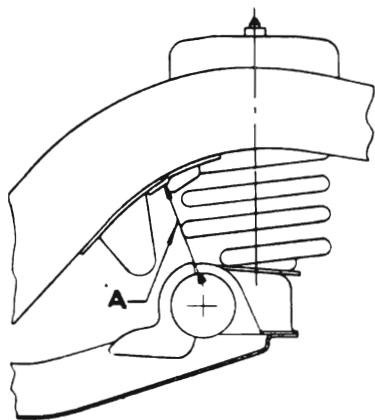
Rear Spring Trim Dimension—Series 40
